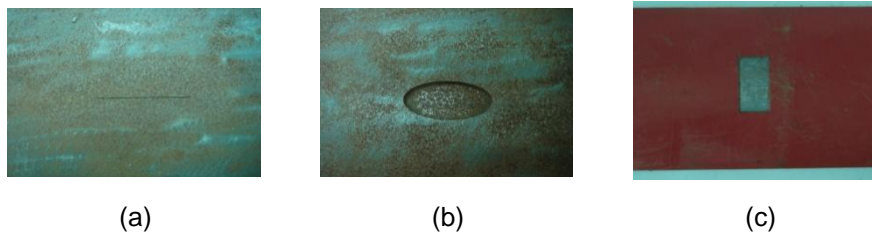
Photos of the fabricated gas pipe specimens with (a) axial crack (depth : 30 %), (b) axial groove(depth : 30 %) and (c) a coating disbondment
